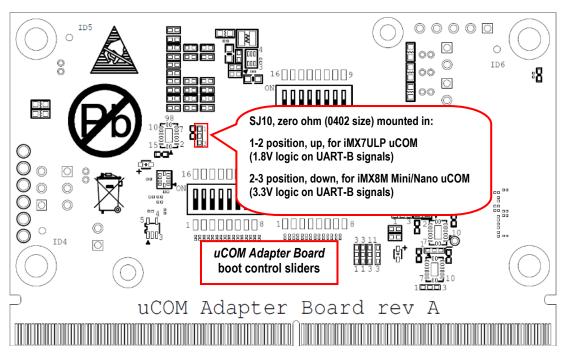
uCOM Adapter Board SJ10 Location, Bottom Side
